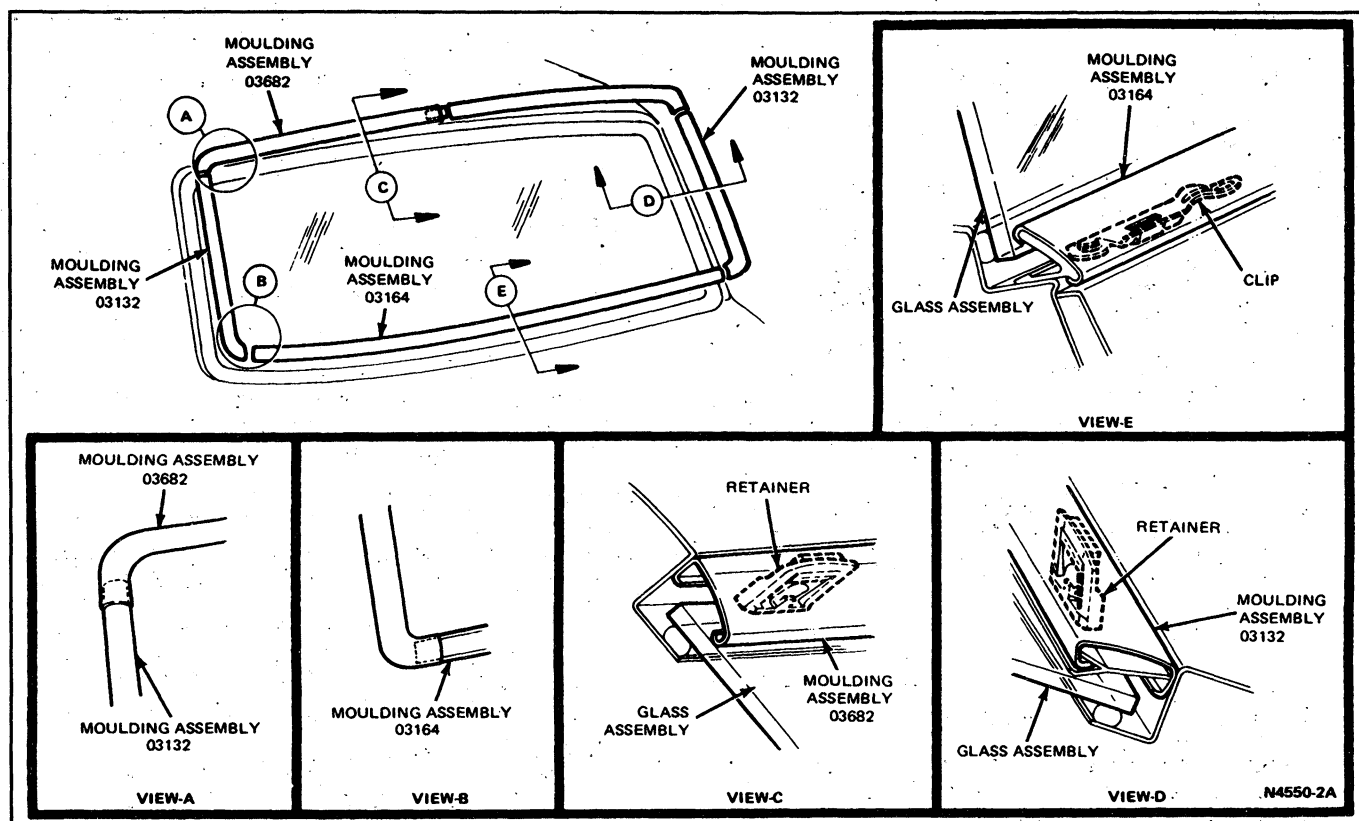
Windshield Exterior Mouldings—F-150—F-350, F-Super Duty and Bronco
